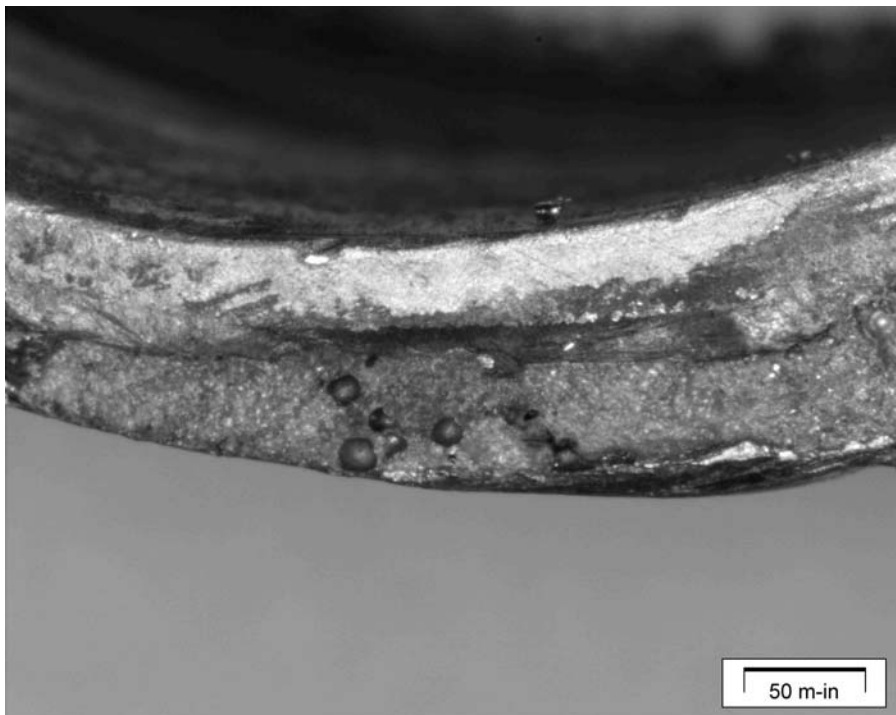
Lack of penetration on the tube side at location F on the drawing.
